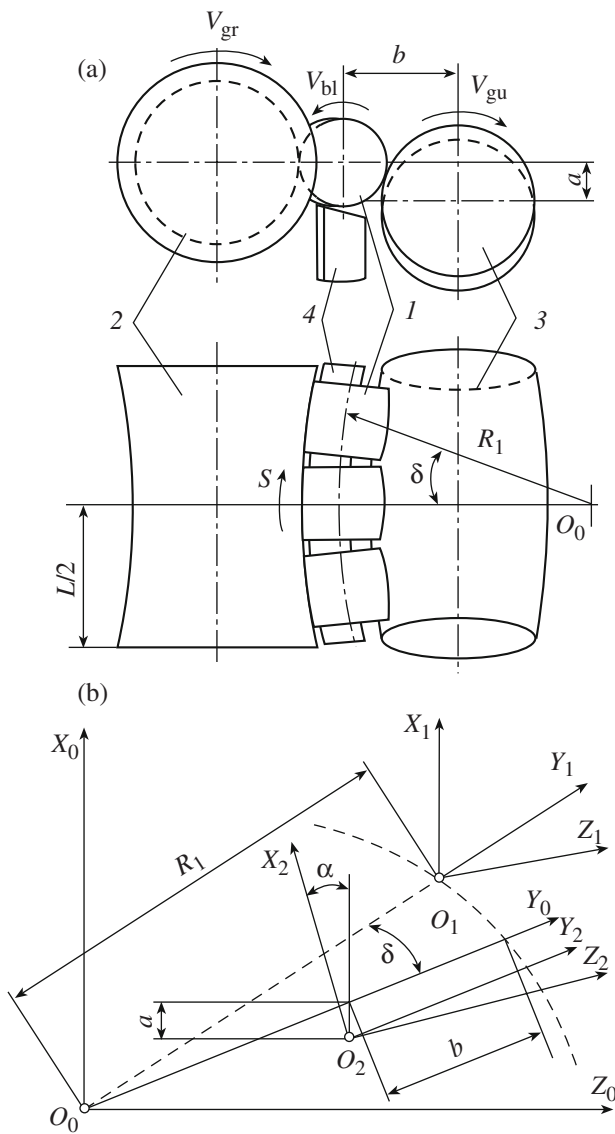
Centerless grinding (a) and guide-wheel configuration in machining cambered surfaces (b).
